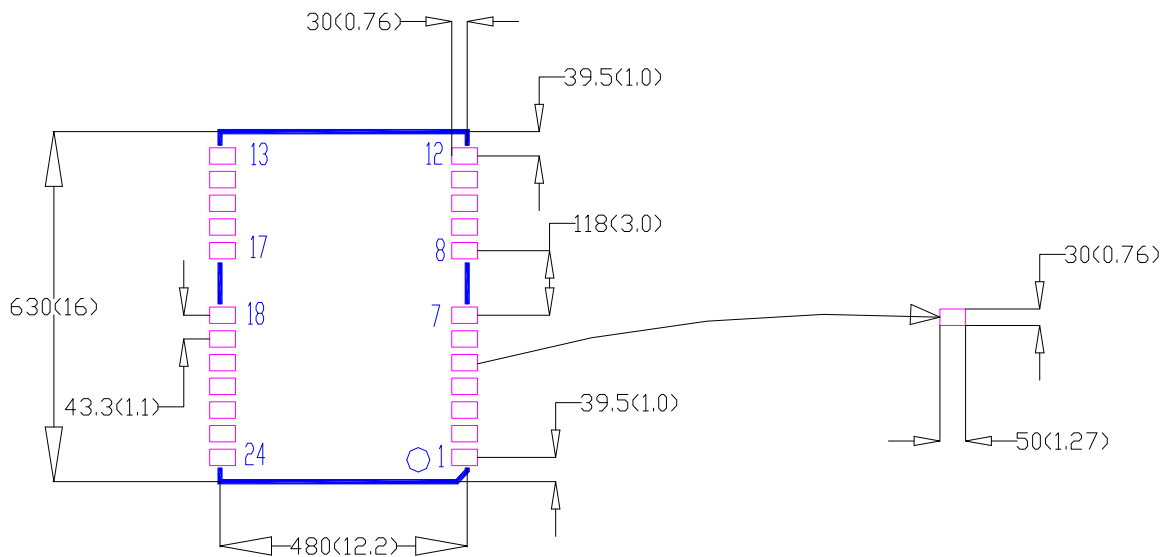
UM220-INS NF Recommended PCB Packaging (unit: mil, in brackets: mm)
